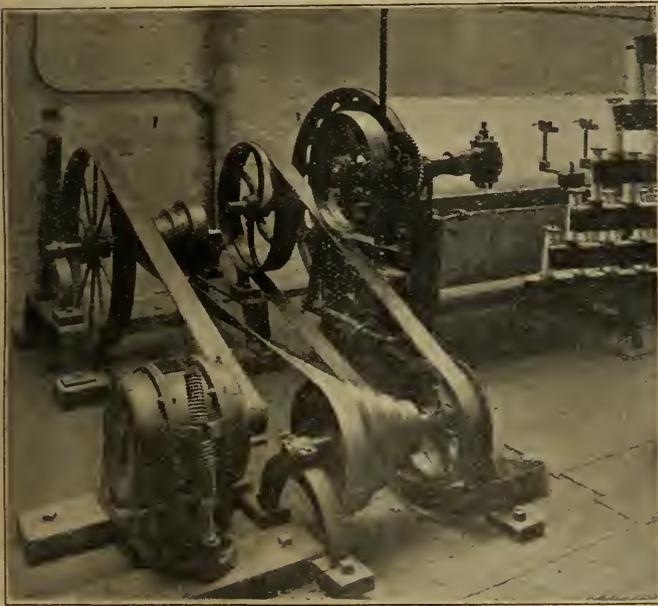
160 BEAMING MACHINE DRIVEN BY 2 B.H.P. MOTOR.
